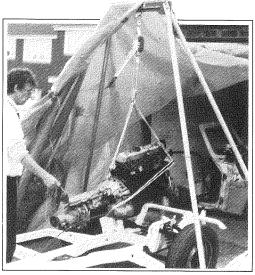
and roll the chassis underneath. Keep sensibly clear at all times. Do get someone around to help should anything go wrong and don't cut corners. Fit new engine and gearbox mountings.
